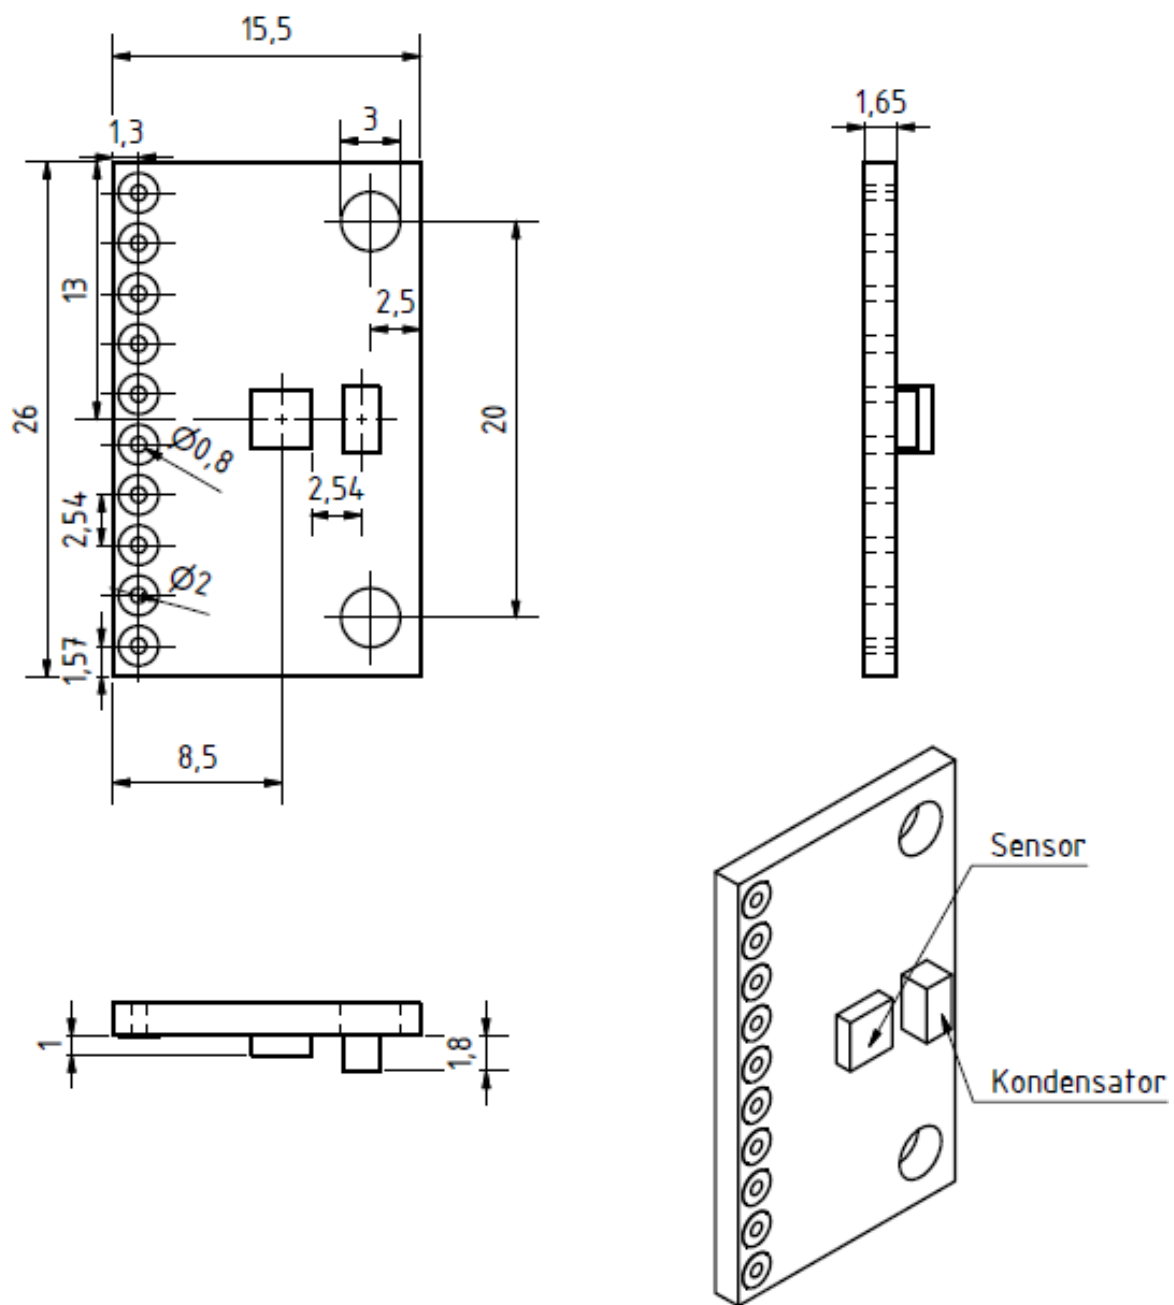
MPU 9250 Sensorboard dimensions (mm)
